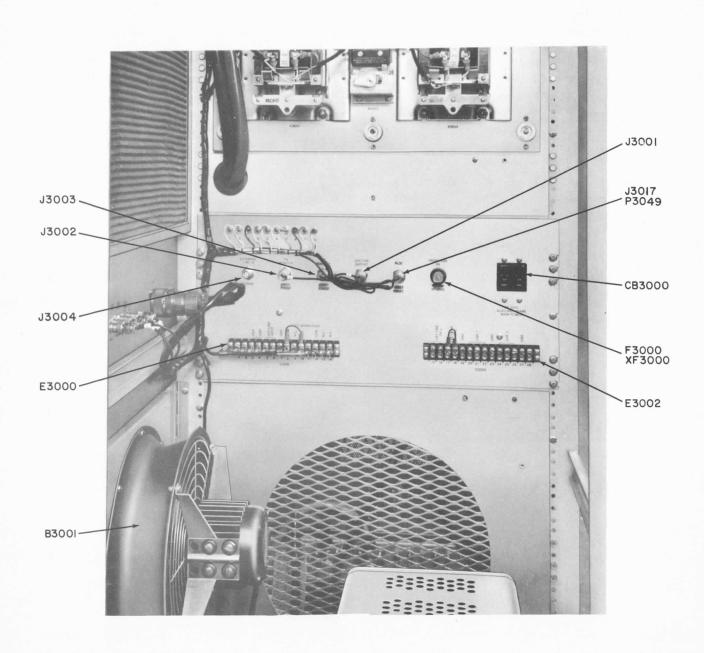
Rear View, Lower Half, Auxiliary Frame Chassis
